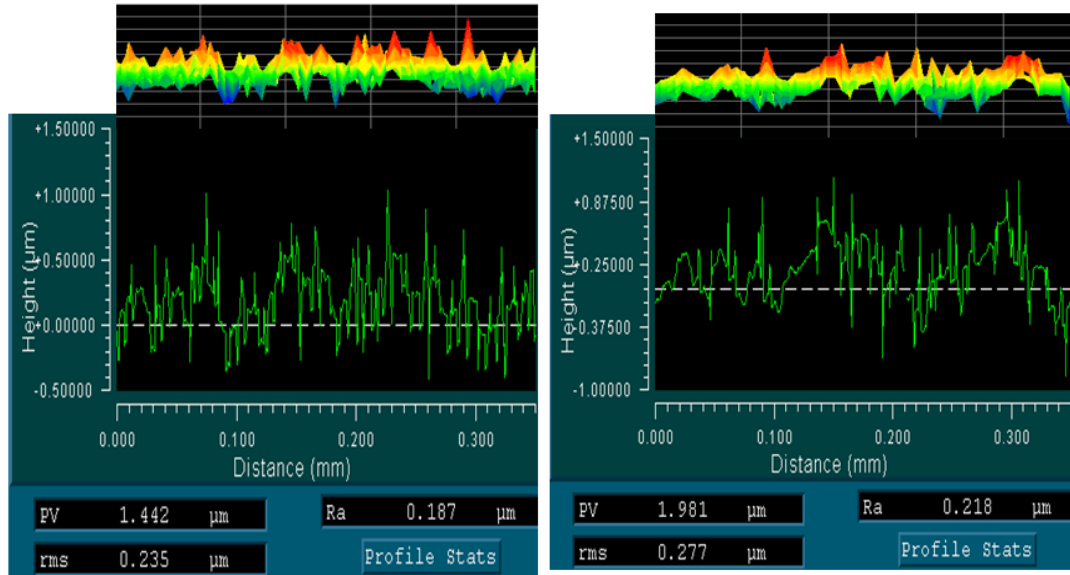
2D profile of the machined surface (a) SDM HT (b) classical HT
